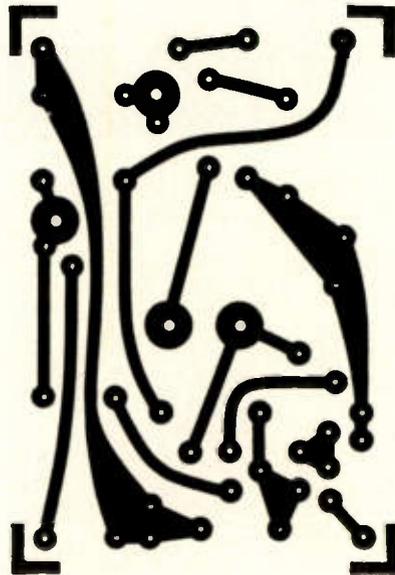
Drawing shows, in actual size, the resist pattern to be copied if you make your own PC board.
